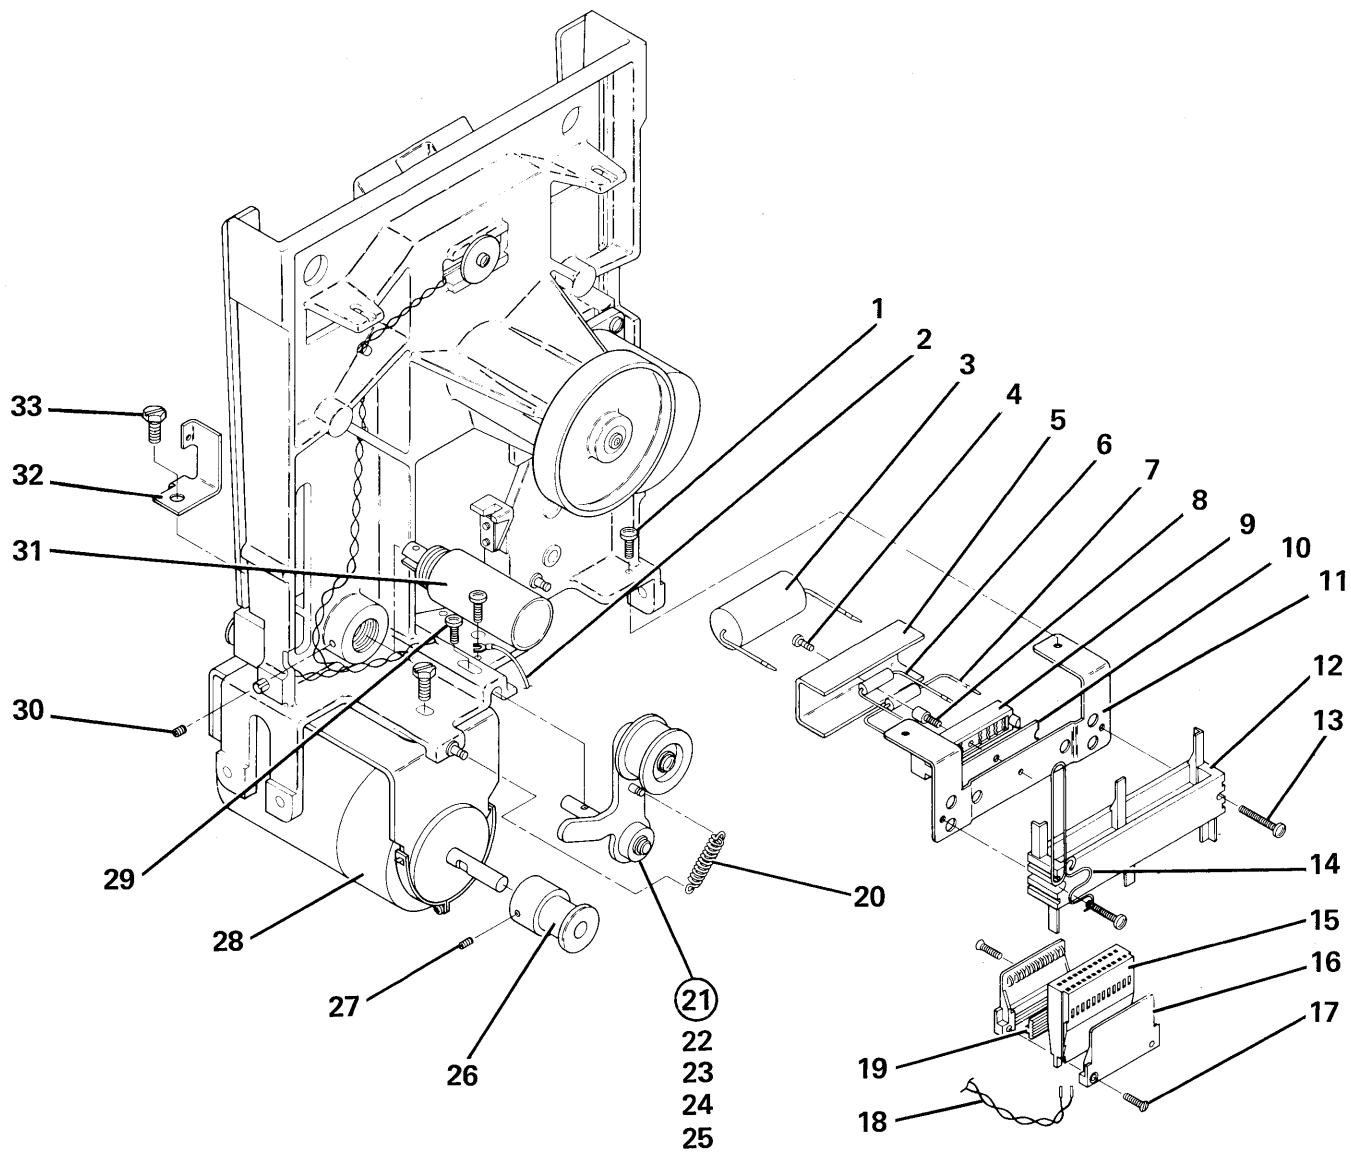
BASE PLATE ASSEMBLY. SEE LIST 18.
